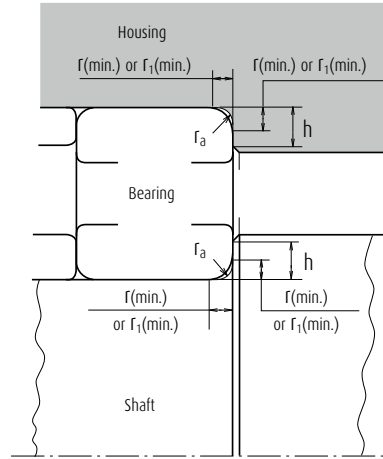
Chamfer Dimensions, Fillet Radius of Shaft and Housing, and Shoulder Height
